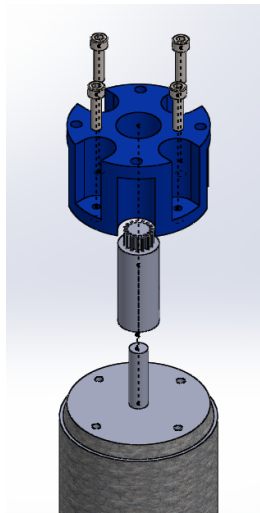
Shaft Coupler and Spacer Affixed to Motor
